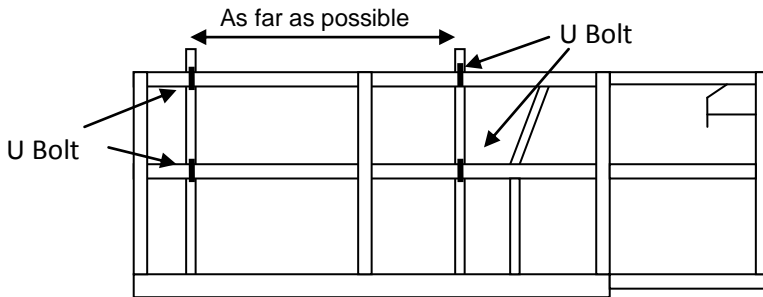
Rio Bar & Tube Handler attachment installation – Deck extended
